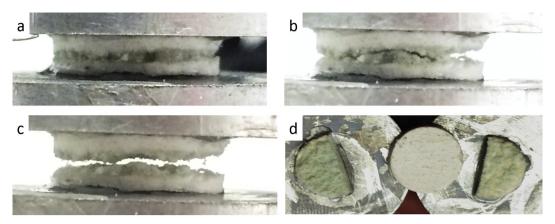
Digital photo of the LAM\_1 tensile test at different deformation. a) not deformed; b) the crack start in the PLA layer (green); c) complete fracture; d) surface fracture of the sample is green, the white laminate in the center is to see better the color contrast. (For interpretation of the references to colour in this figure legend, the reader is referred to the web version of this article.)
